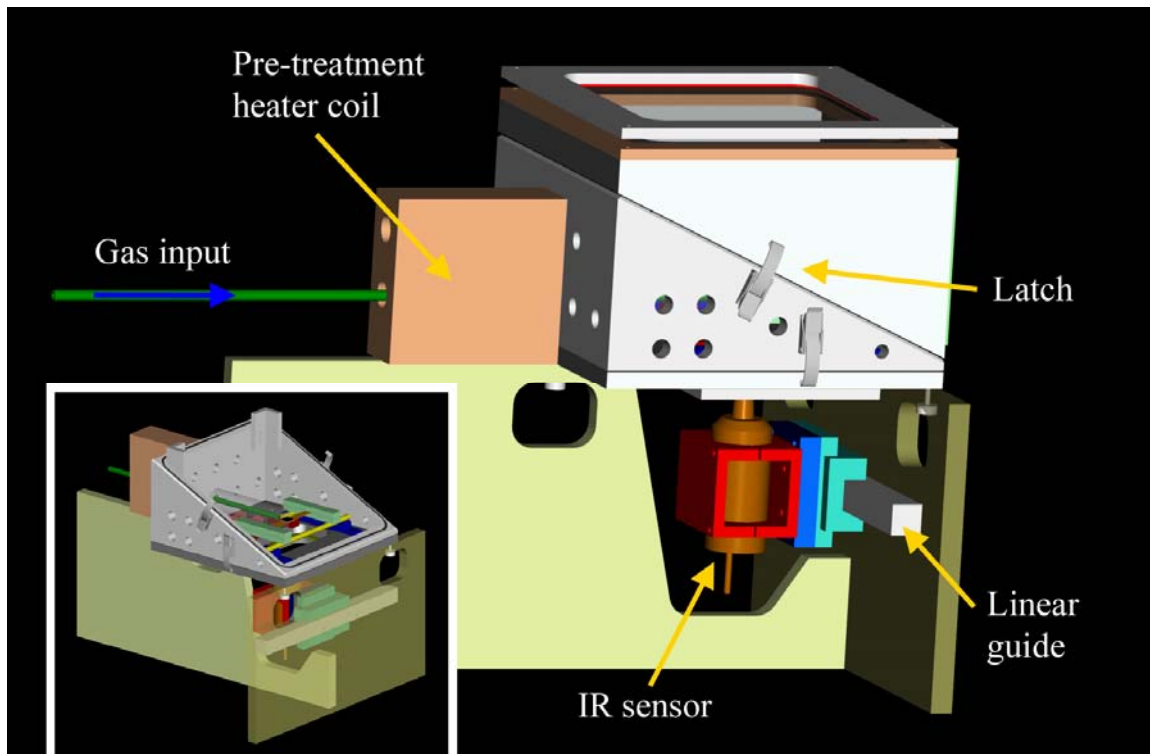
CAD drawing of the Hart and van Laake box CVD furnace system exterior
